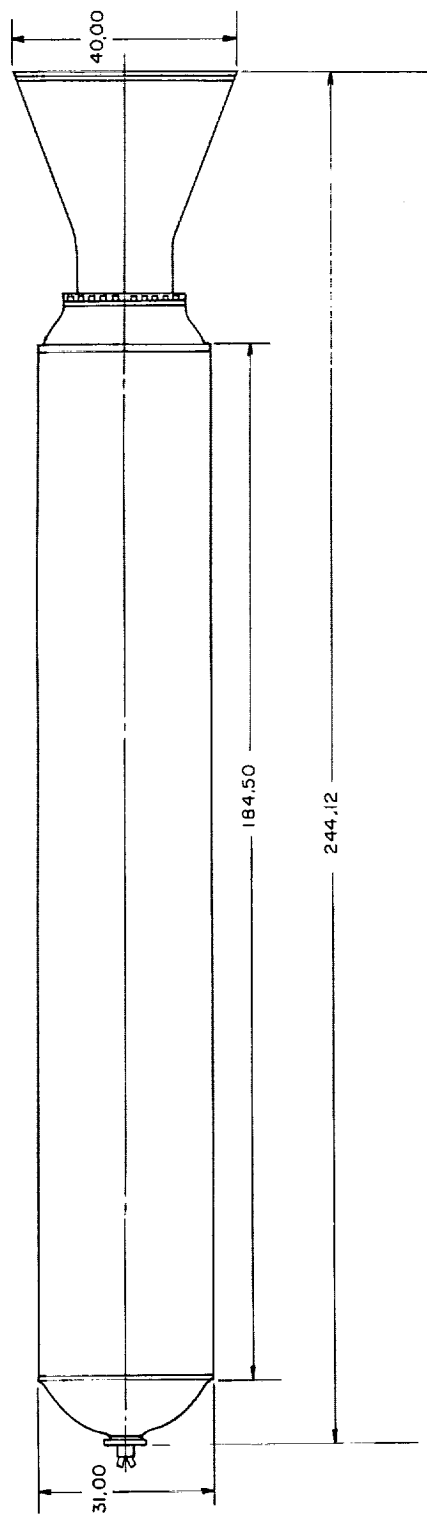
External view of Castor rocket motor. All dimensions are in inches.
